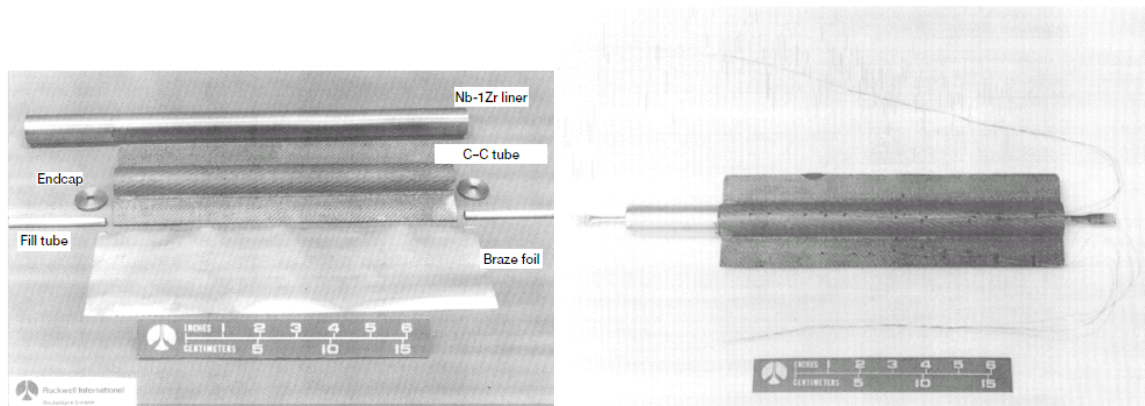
C-C Heat Pipe Before (Left) and After (Right) Assembly [from Ref. 24, p.5-6]
